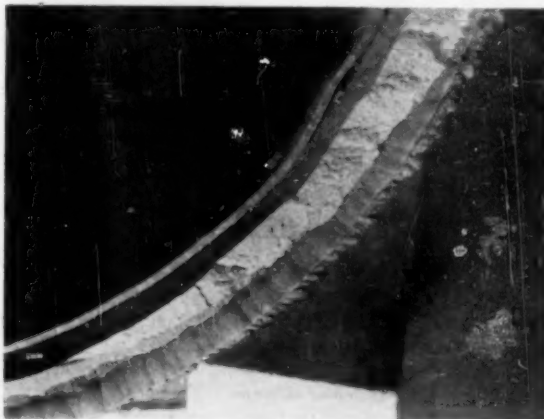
DETAILED VIEW OF TEST SPECIMEN AFTER FRACTURE
